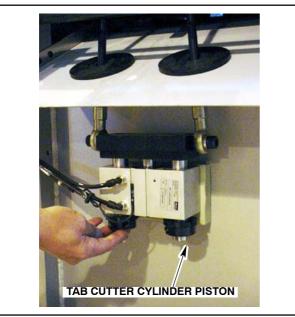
Push Up Tab Cut Cylinder Piston
